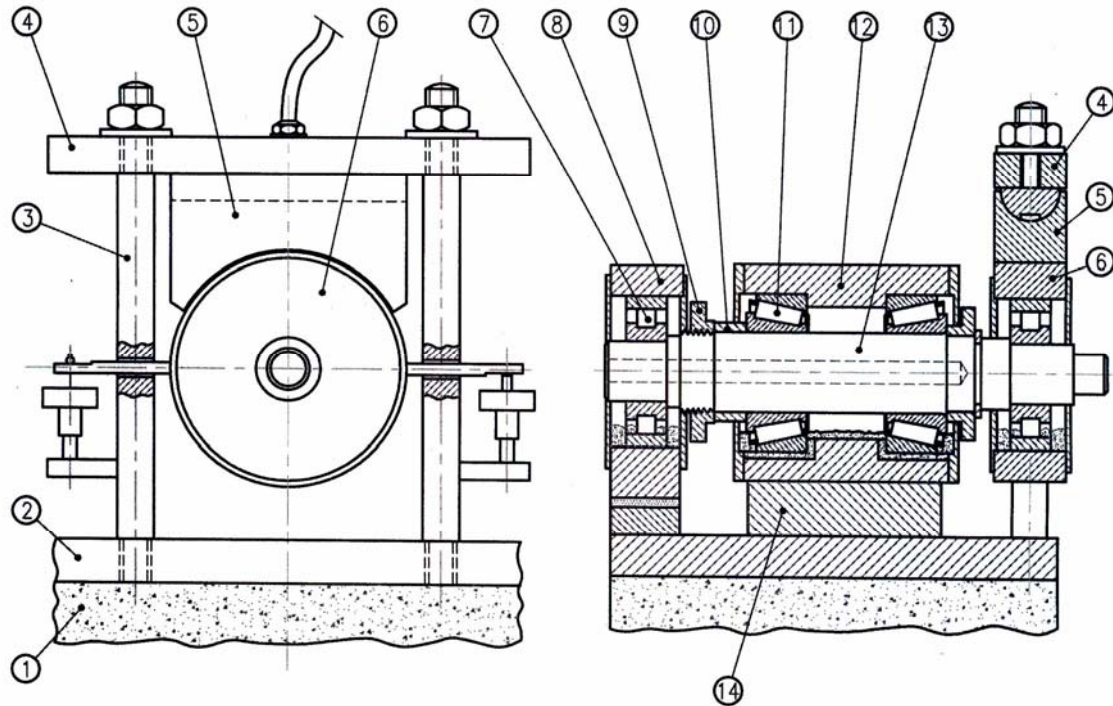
The test module, showing the test shaft and the twin tapered roller bearings
